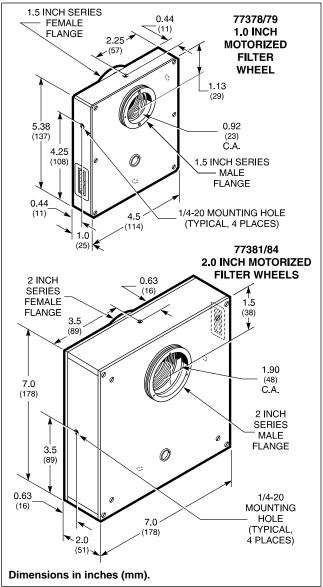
Dimensional diagram of Motorized Filter Wheels.
